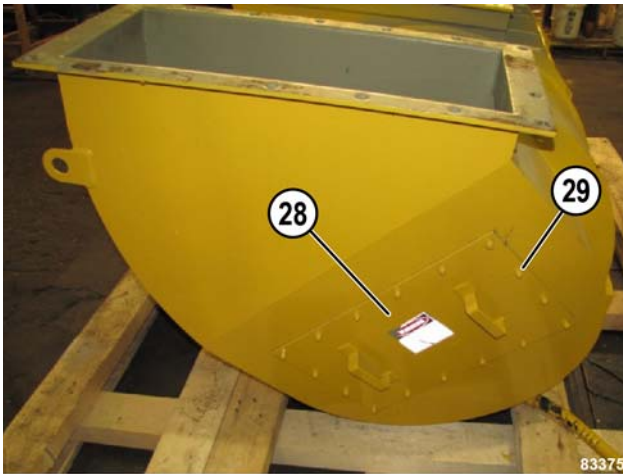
INSTALLING THE INLET BOX COVERS
